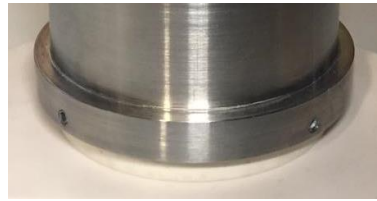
Metal edge on the bottom of the SS's fixtures to support the holder.
